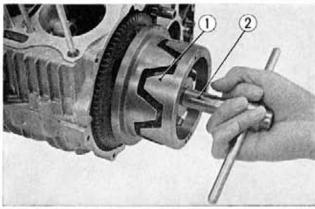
(1) A.C. generator rotor (2) Rotor puller
